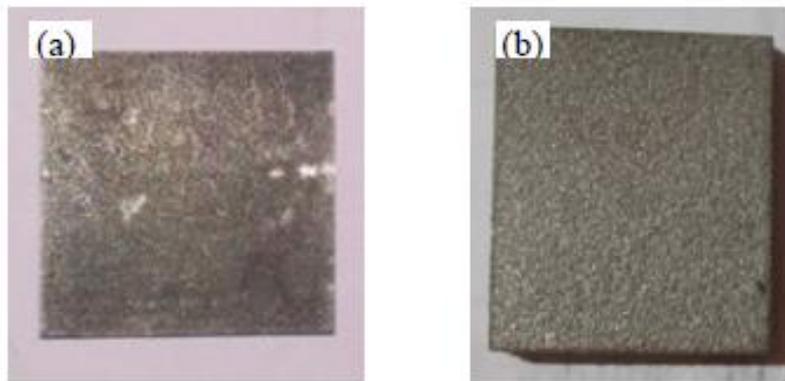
(a) Base metal Inconel 601, (b) WC-8Co-2Cr coated specimen.
